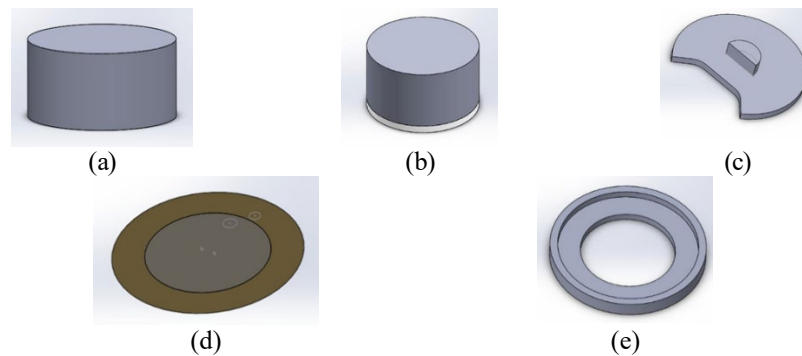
(a)Cylinder shape pusher (b) Cylinder shape pusher with glue on the bottom (c) Three-quarter circle pusher (d) 35 mm piezoelectric (e) Piezoelectric case
